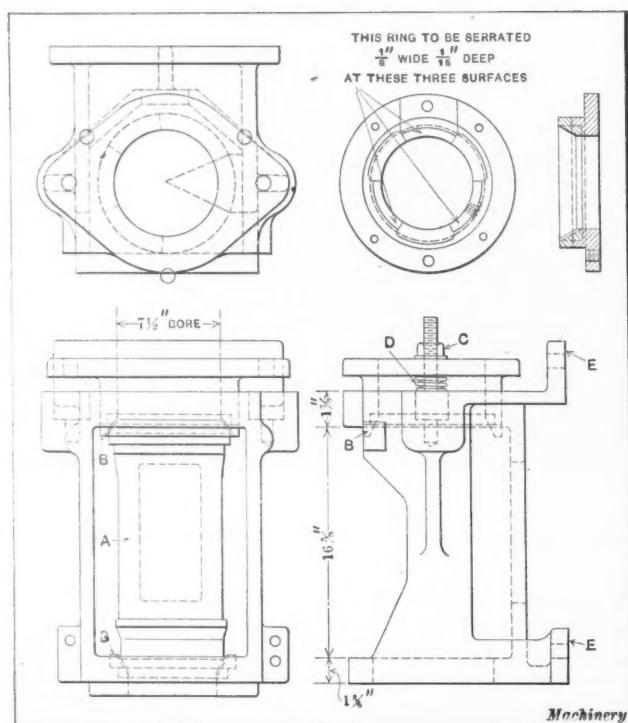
Design of Work-holding Fixture used on Continuous Progressive Type of Boring Machine shown in Fig. 1
